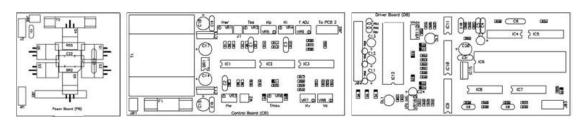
Proposed three PCBs to enclose all electronic circuitry (from left: power, control, and driver boards)
